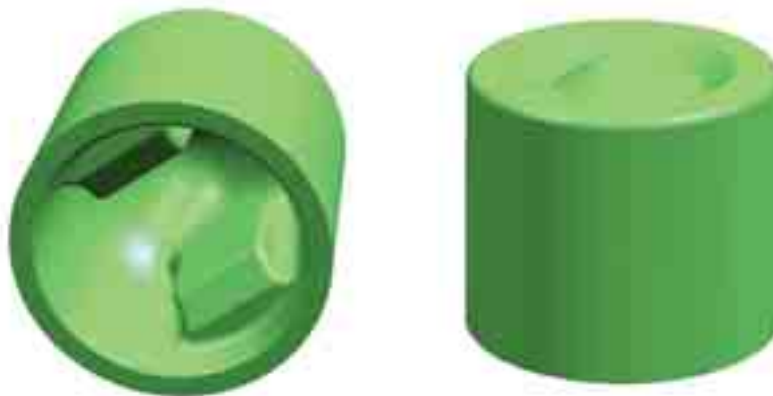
3D computer model mould of the 1304-05-1 novel piston
